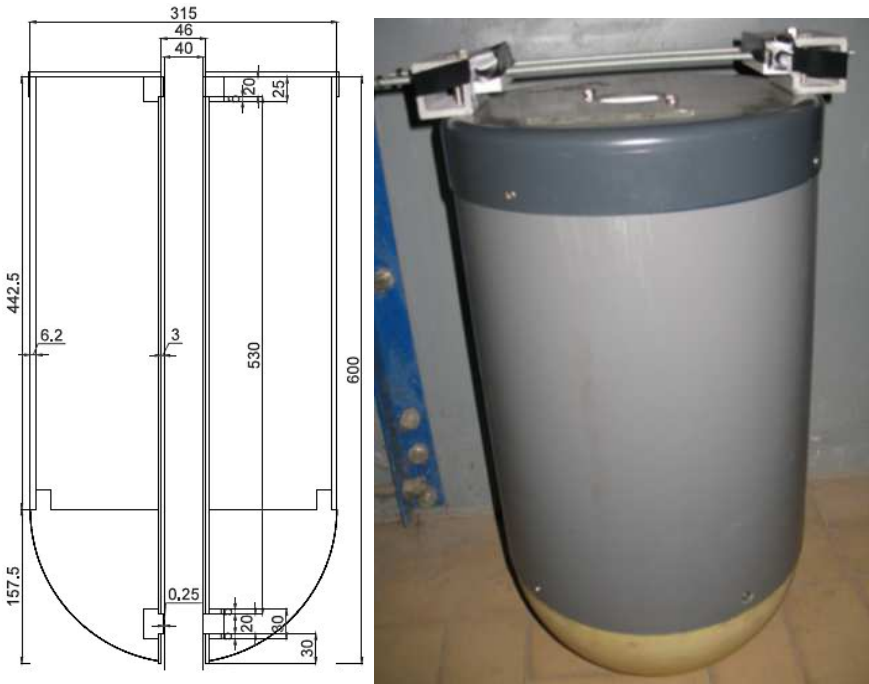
Details of the WEC part (a): left (dimensions in mm): Cross section showing the 2 PTFE-bearings at the top and at the bottom (20-25 mm thick). The WEC shaft passes through a shaft bearing along the entire length of the buoy; right: Front view showing the lower hemispherical PUR part, the cylindrical vertical PVC part and the top PVC cover.
